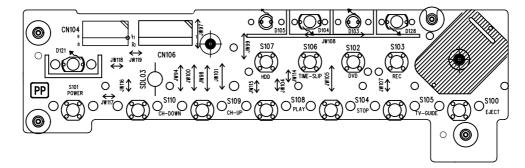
EU03B Front (L) PC Broad (Top side)
